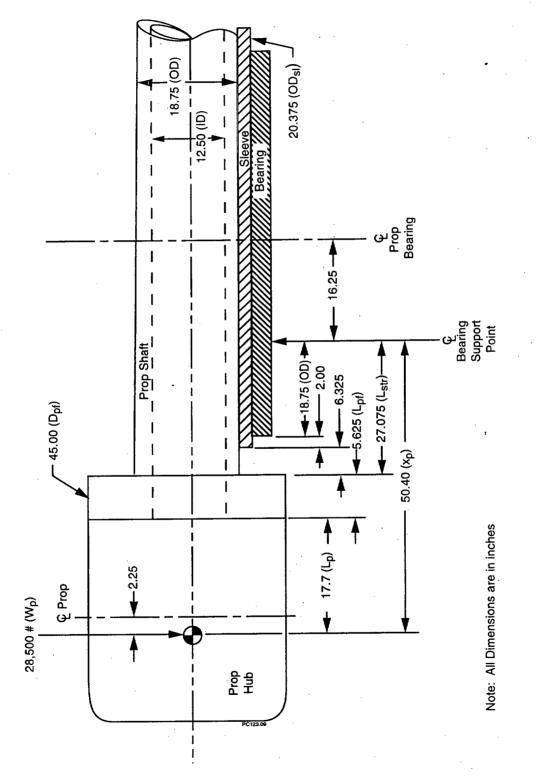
Controllable Pitch Propeller Shafting System: Aftermost Bearing Support Point.
